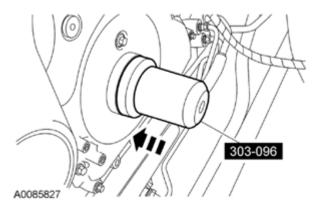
Installing Crankshaft Front Oil Seal Using Camshaft Front Oil Seal Installer (303-096) Courtesy of FORD MOTOR CO.
